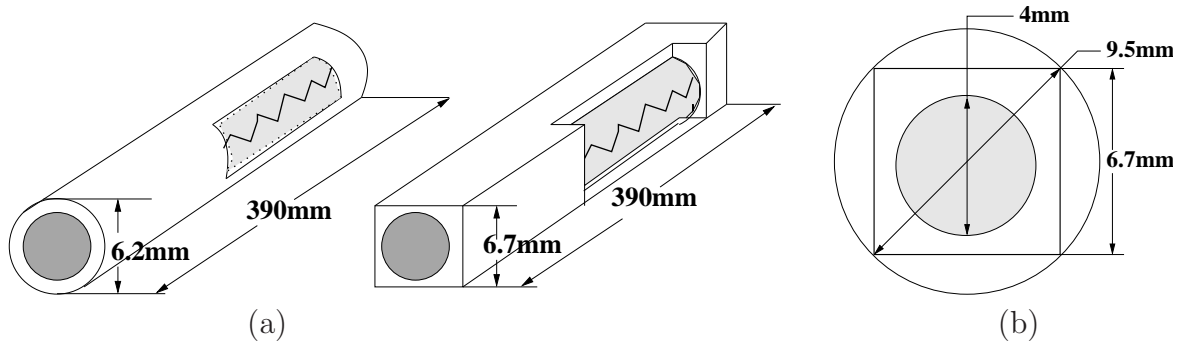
(a) Dimensions of the circular and square cylinders and, (b) Fabrication of square section cylinder from circular cylinder.
